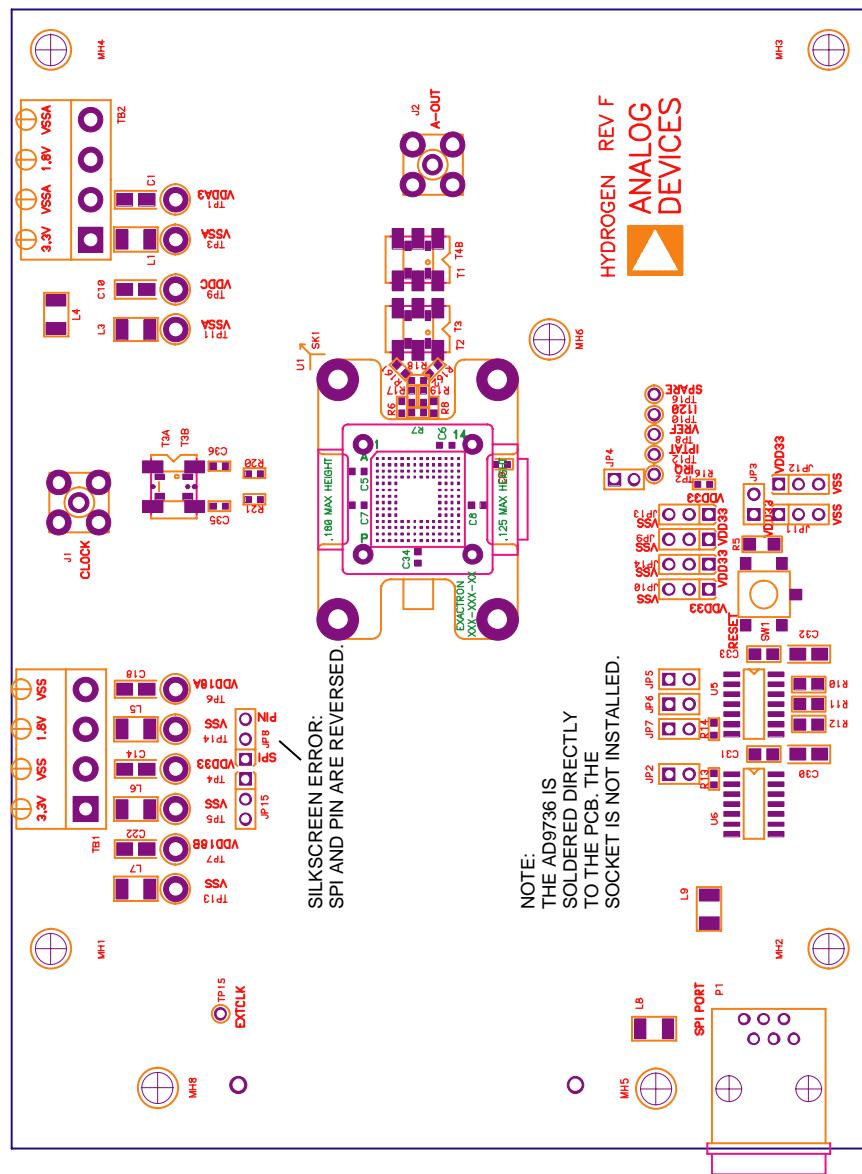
CB Layout Top Placement, AD973x Evaluation Board, Rev. F
